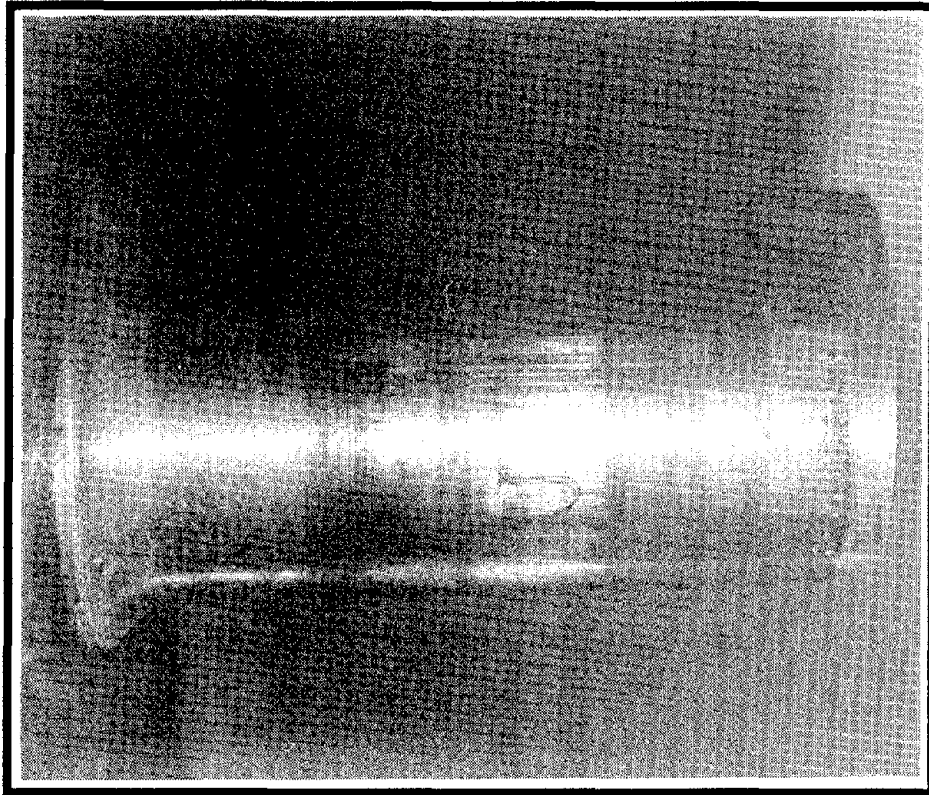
RBFM II Post Test Axle Journal Condition – Bearing I
